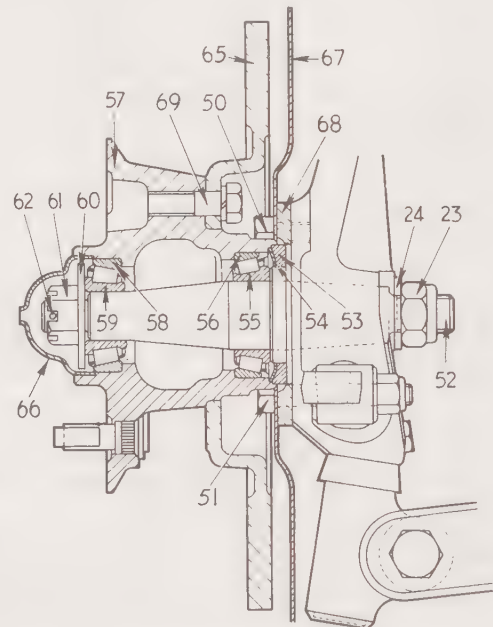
15 Section of front hub and brake. (For part numbers refer to Fig 8:3.)
